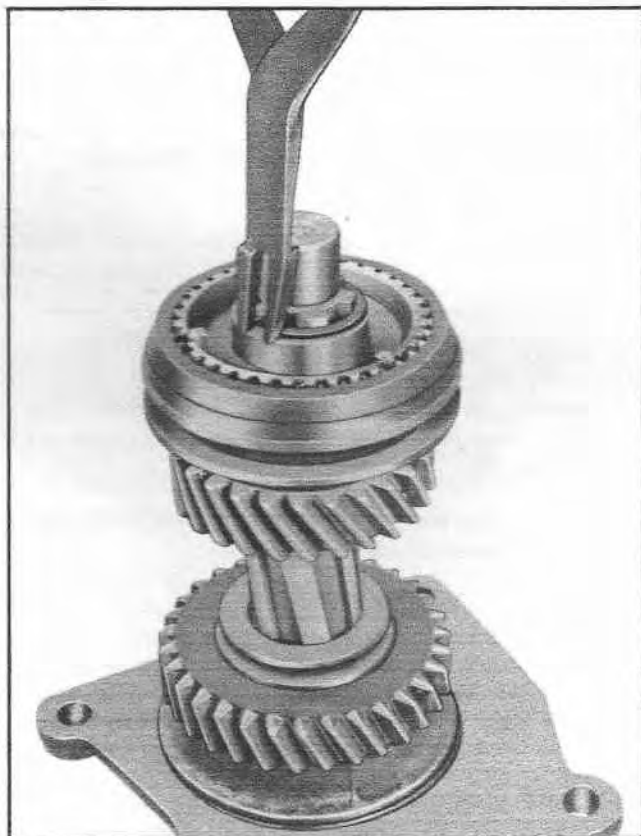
Removing or Replacing Mainshaft Snap Ring
